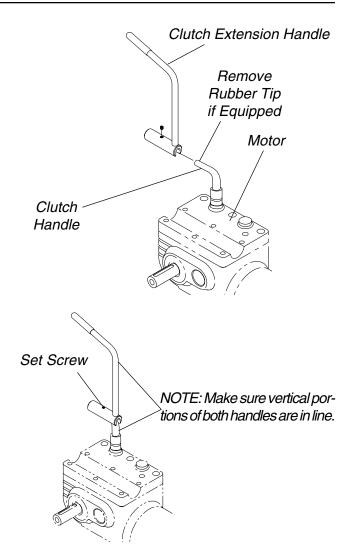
INSTALLING OPTIONAL CLUTCH EXTENSION HANDLES
